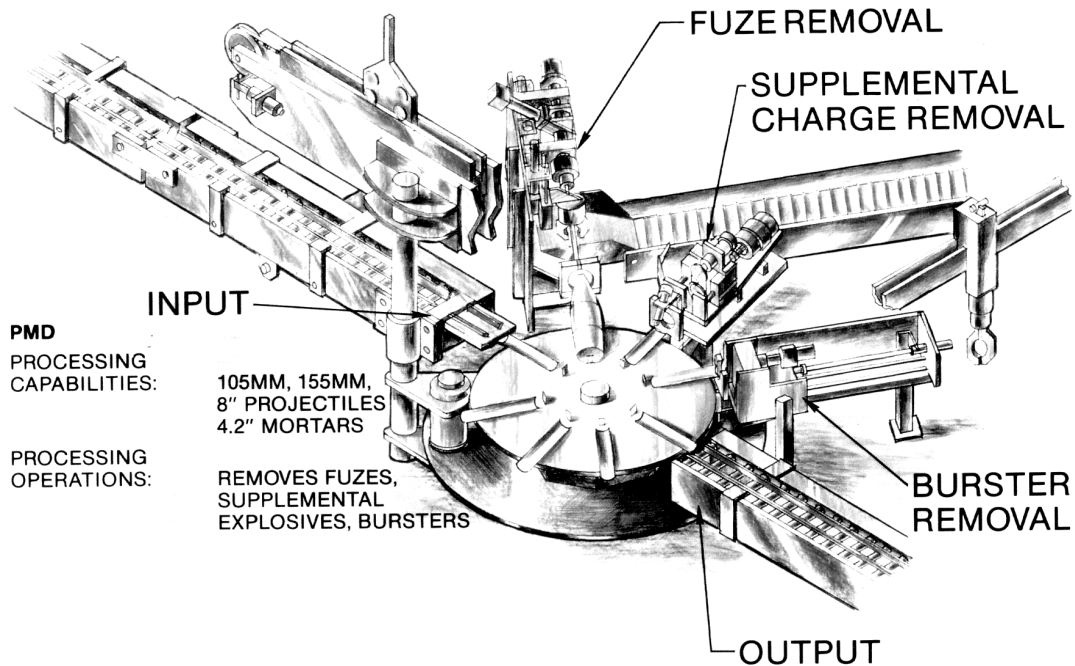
Baseline Projectile/Mortar Disassembly Machine
